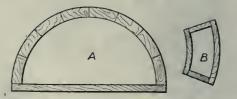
SKELETON CORE BOXES FOR MAIN CORE AND FLANGE COVER CORE.
